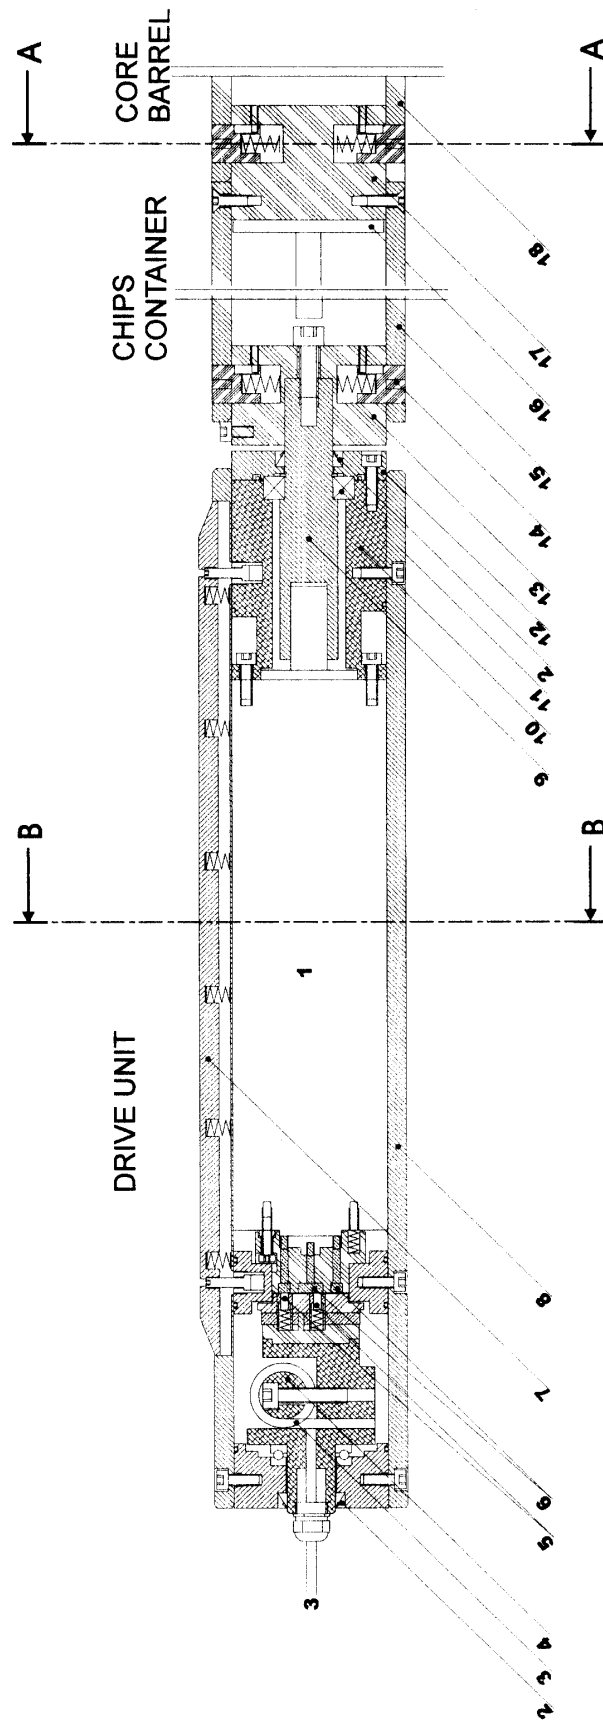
Cross section design of the complete FELICS drill system. (1) DC-Motor (60 V, 4.2 A, Type Dunker GR 80 × 80) with reduction gear (Type PLG 70,  $r=28:1$ ), (2) circular seal (Lubroseal LM17C), (3) steel cable, (4) cable clamp, (5) electrical contactors, (6) slip-ring, (7) anti-torque system, (8) jacket, (9) shaft, (10) motor support, (11) ball bearing, (12) bearing cover, (13) motor clutch, (14) clutch bolt, (15) chips container, (16) chips extractor, (17) drill clutch, (18) core barrel.
